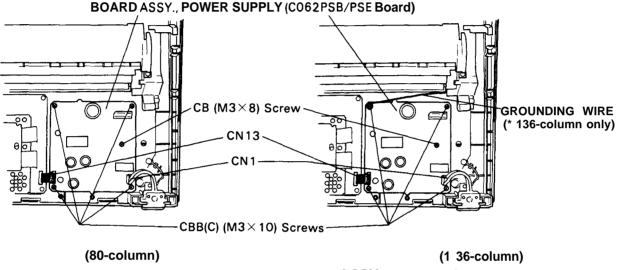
Removing the BOARD ASSY., POWER SUPPLY
